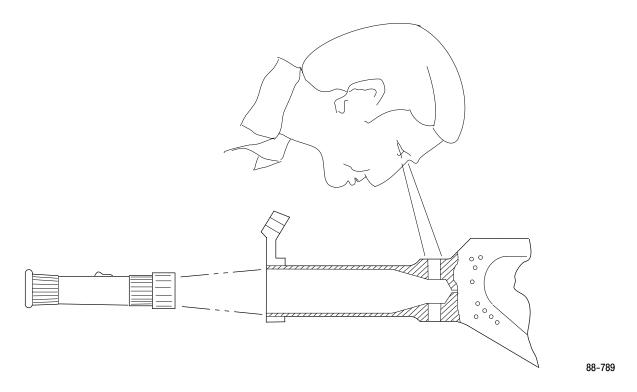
Method for Visual Inspection of the Root Fitting
